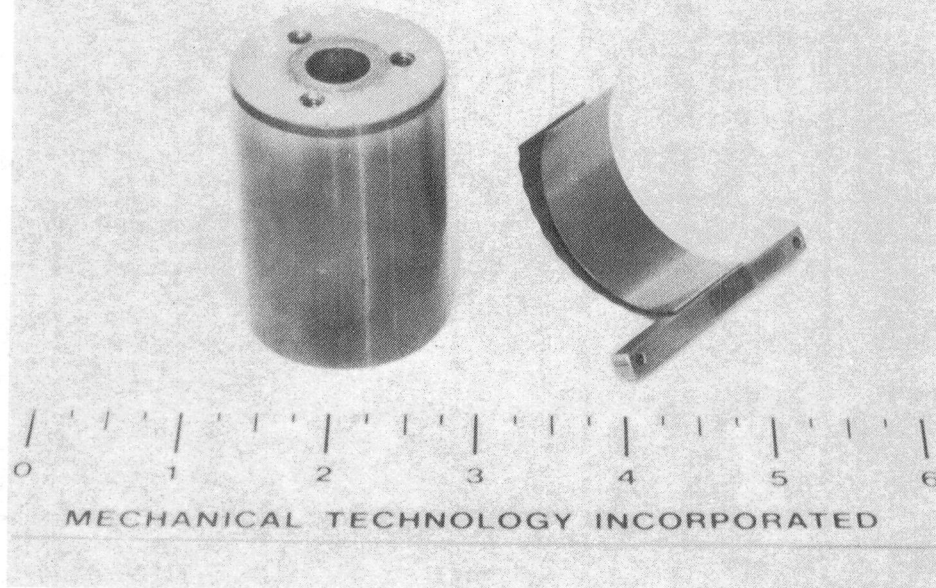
Partial Arc Foil and Journal Test Specimens
